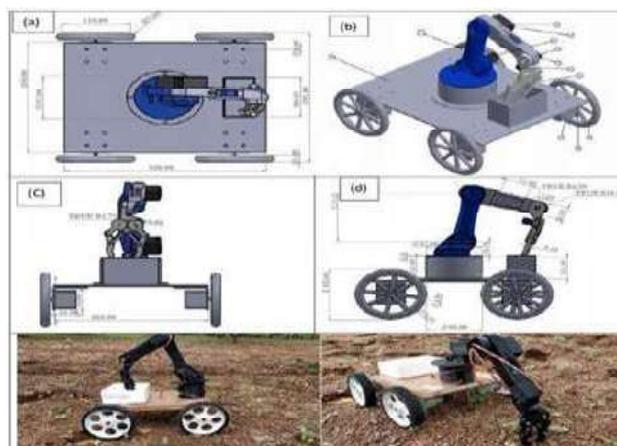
Three-dimensional CAD model of the different components of Smart seed sowing robot and actual 3D printed robot (a) Top view of the smart robot, b) Isometric view of the smart robot, (c) Front view of the smart robot, (d) Side view of the smart robot, (e) and (f) Testing of the fabricated robot in the field
